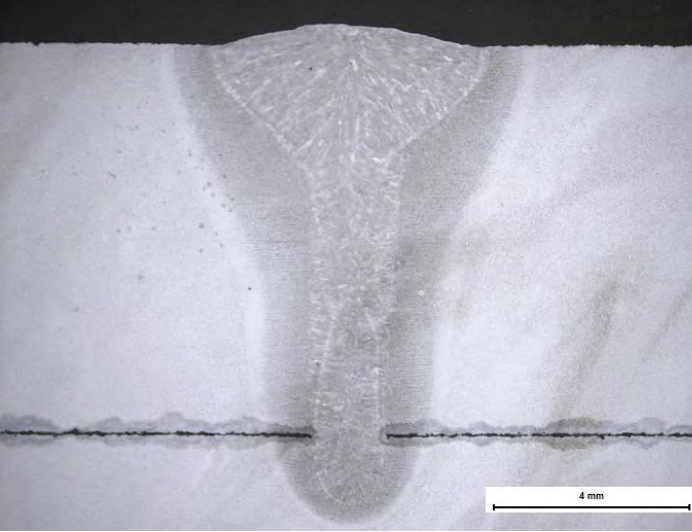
Stake weld, L-type, cross-section, overview.
